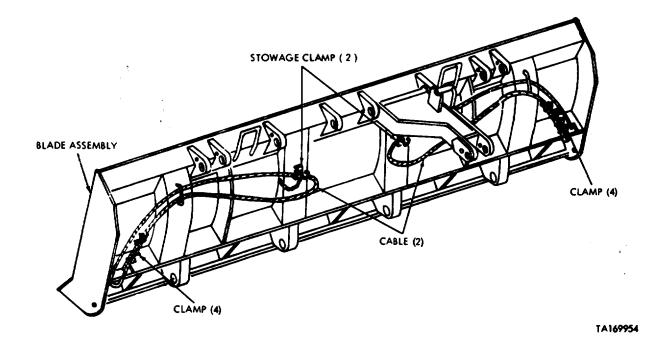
Emergency lifting cables - stowed on blade assembly.
